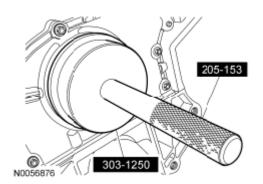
Identifying Rear Main Seal Installer On Crankshaft Courtesy of FORD MOTOR CO.
